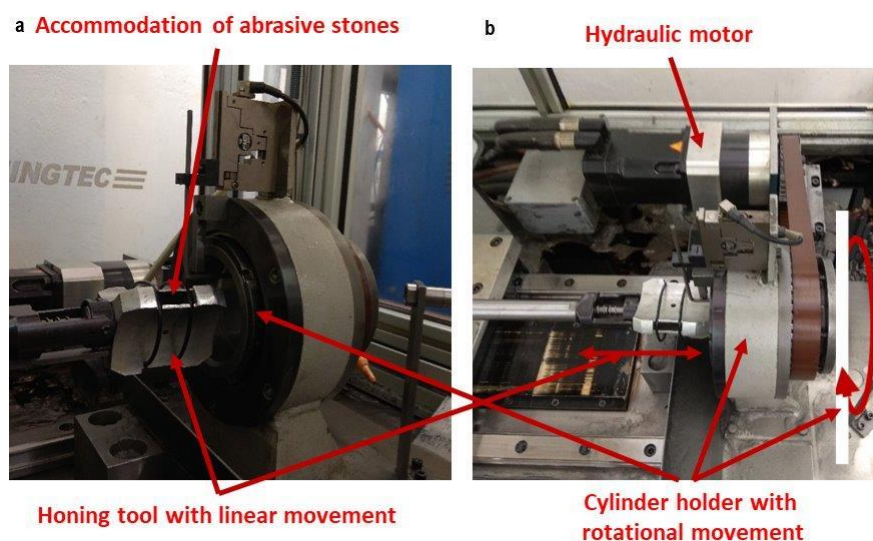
Honing test machine used: (a) Front view; (b) top view.
